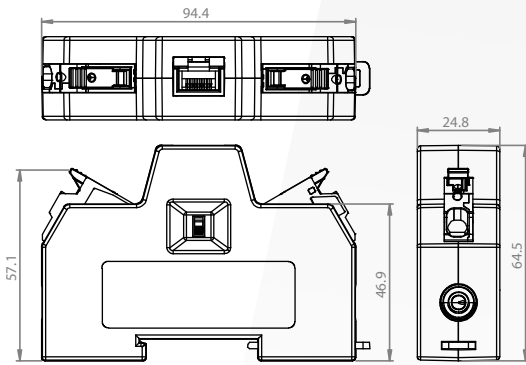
Dimensions of the CSR-25-HBW sensors.
